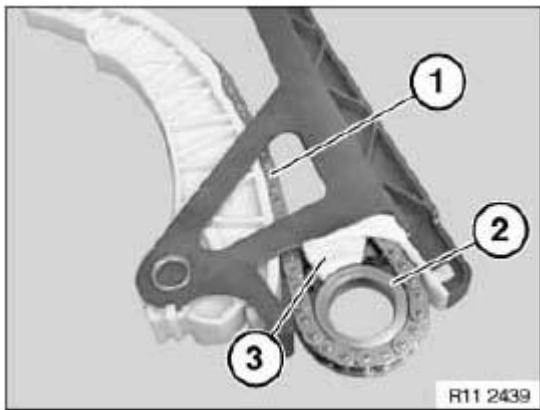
Identifying Timing Chain, Sprocket Wheel And Chain Guide
